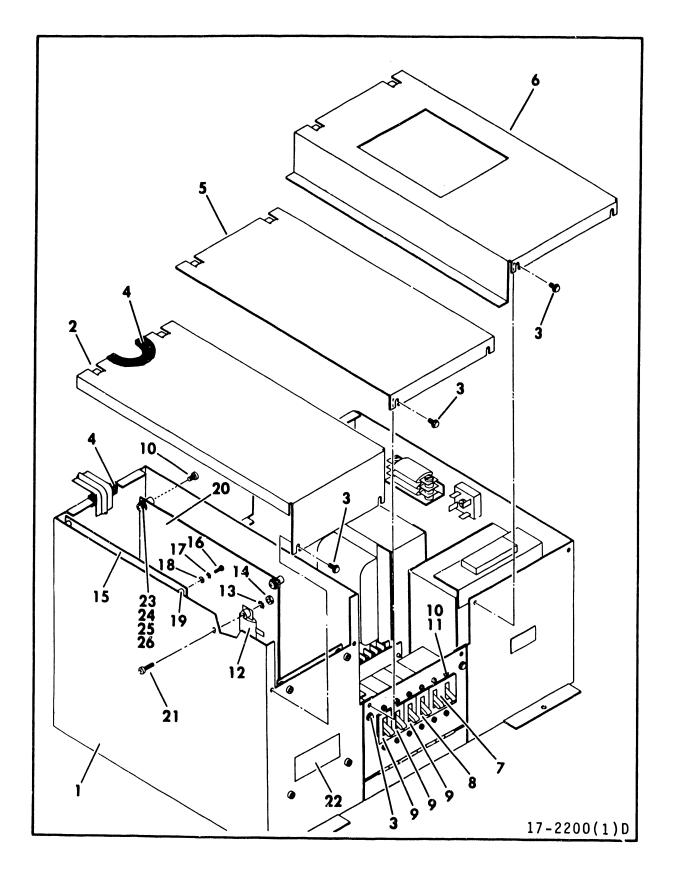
A-22. DC Power Supply Assembly (Sheet 1 of 3) 83323560 H
